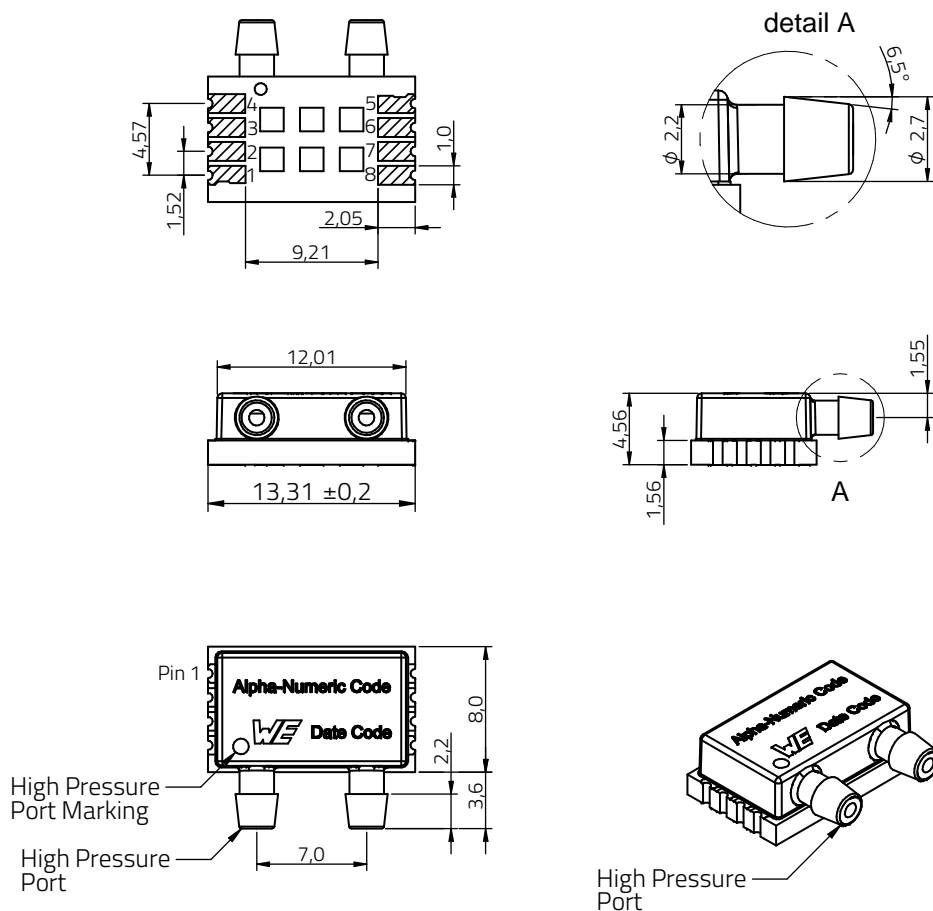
Sensor dimensions: Horizontal-barbed nozzles [mm]
